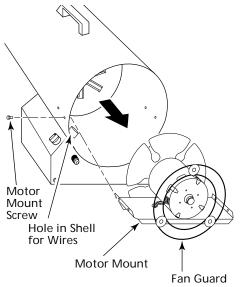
Removing Motor, Motor Mount, and Fan Guard from Heater
